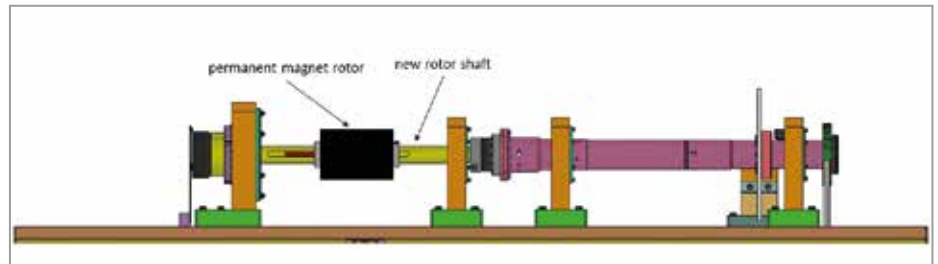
Drawing of the rotation test stand including new shaft and rotor
